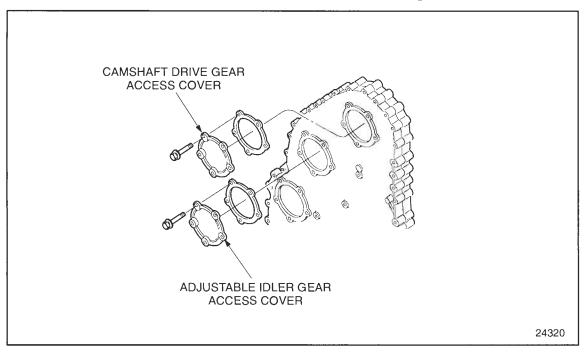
Camshaft Drive Gear and Adjustable Idler Gear Access Cover
